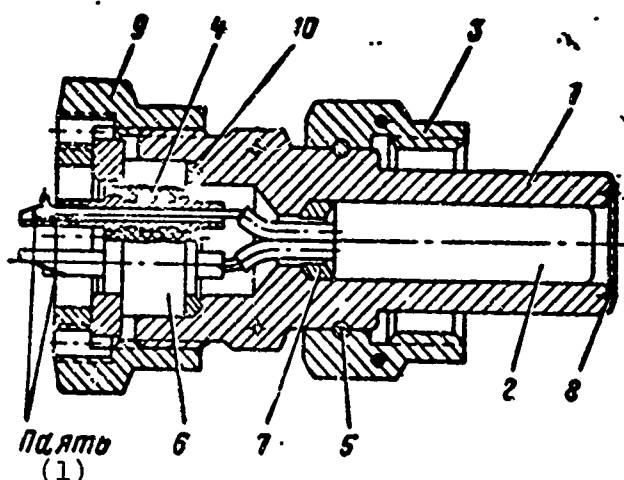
The explosive cartridge: 1 - housing; 2 - explosive charge; 3 - connector nut; 4 - terminal; 5 - stop ring; 6 - panel; 7 - ring; 8 - membrane; 9 - nut; 10 - gasket.
